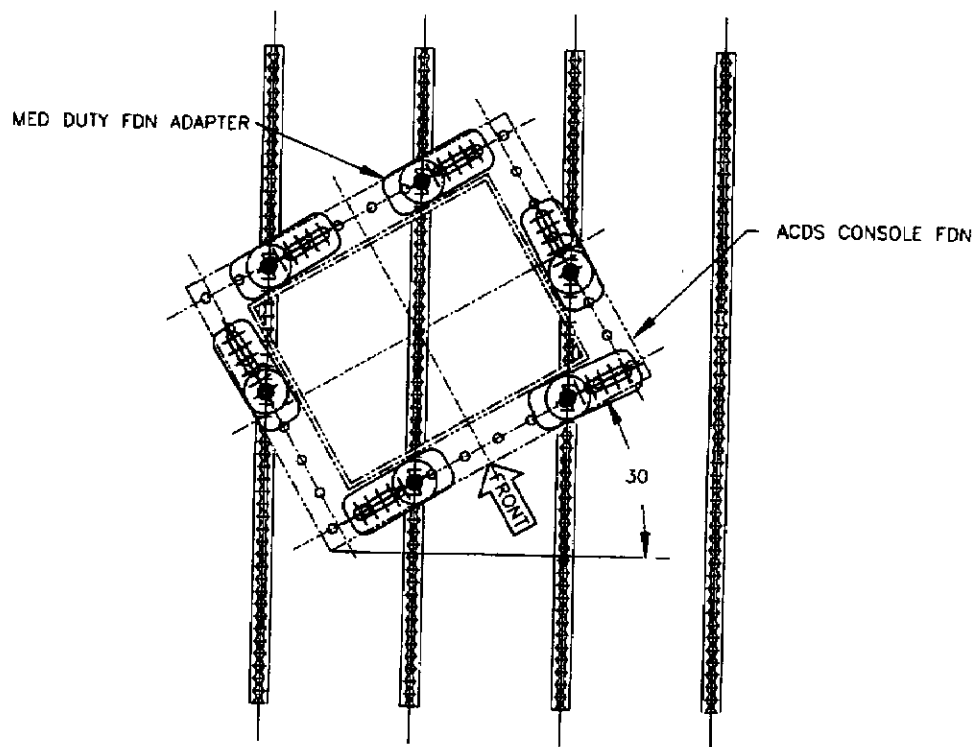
Typical Equipment Located At 30 Degrees To Track.
